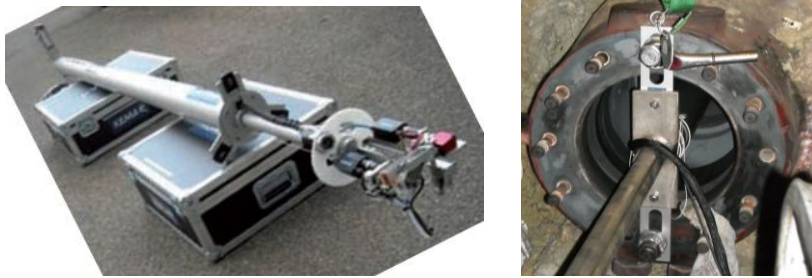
Left: manipulator. Right: manipulator entering through circular shaped inlet nozzle of the steam turbine.
